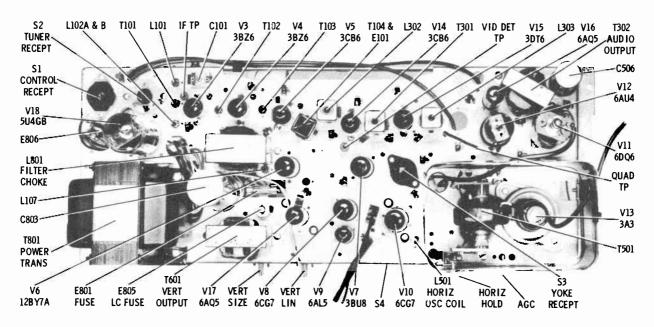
CHASSIS TS-544A-00 PARTS LOCATION
